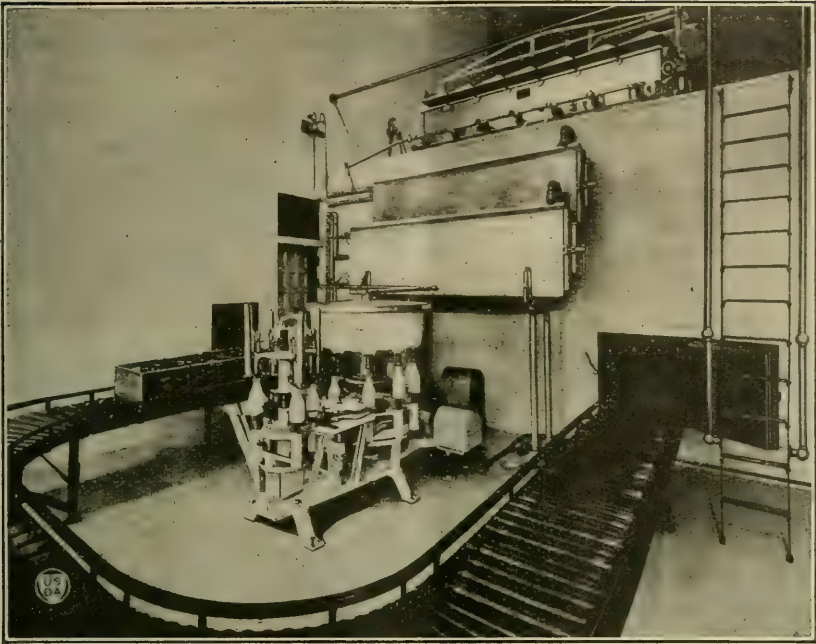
Rotary-type filler and capper. Note conveyers used to convey the bottles from the bottle-storage room and, after being filled, to the milk-storage room.
